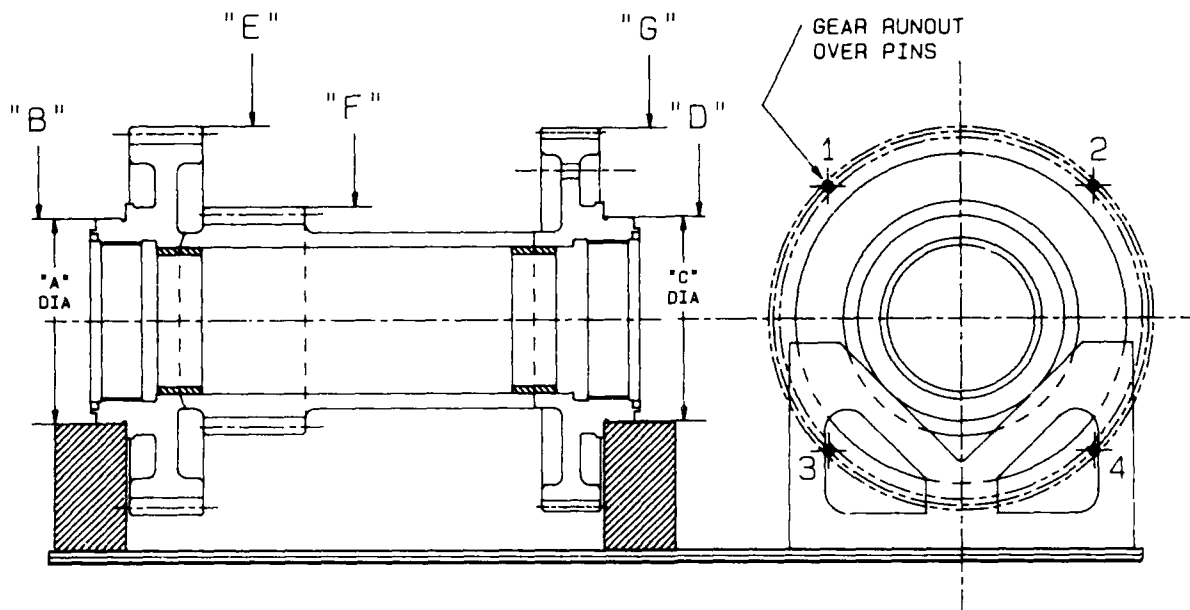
SETUP FOR ROLLING SURFACE AND GEAR RUNOUT MEASUREMENTS
